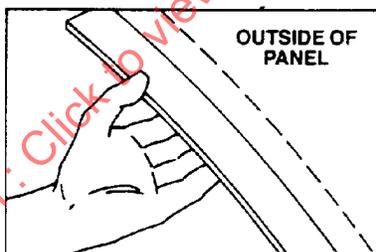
ASSEMBLE AND POSITION BONDING STRIPS
